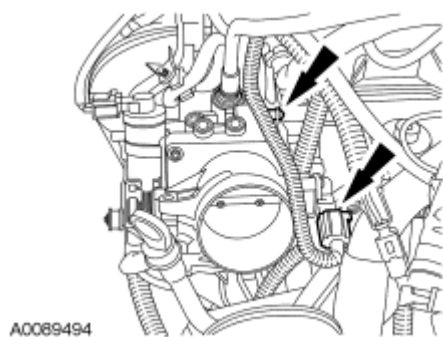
Locating Throttle Position Sensor Electrical Connector And Wiring Harness Pin-Type Retainer
